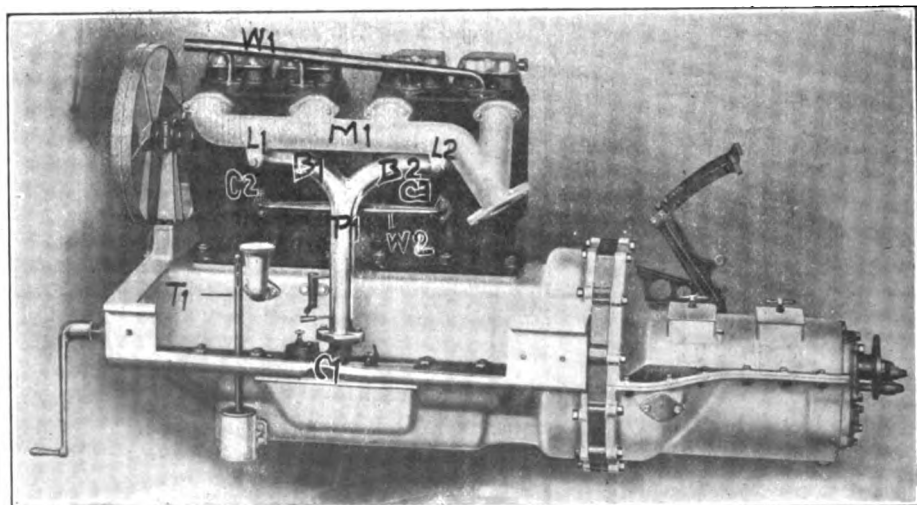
Inlet and exhaust side of motor, also showing oil gauge
